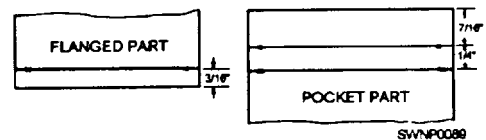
Layout of a 1/4-inch Pittsburgh lock seam.
